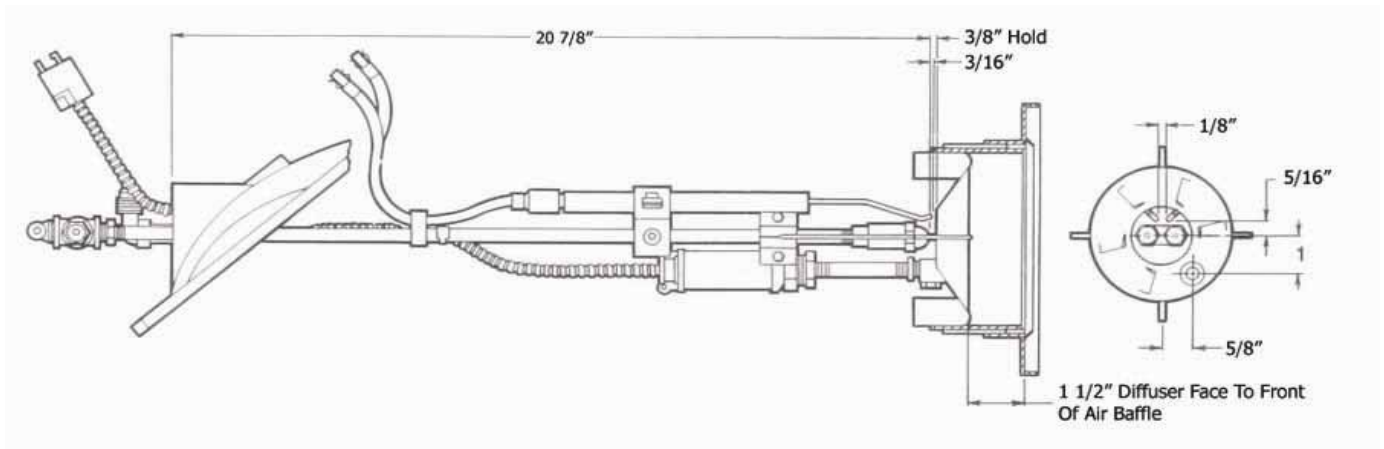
FPL 25, 28, 36, & 42 Drawer Dimensions
